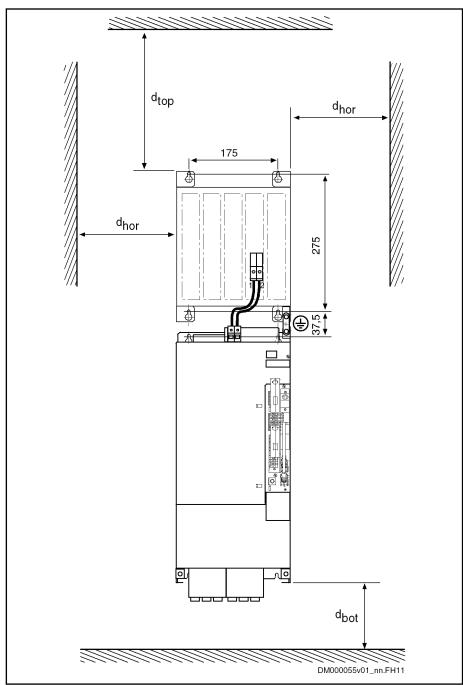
Dimensions Braking Resistor HLR01.1N-0470-N11R7-A-007-NNNN
